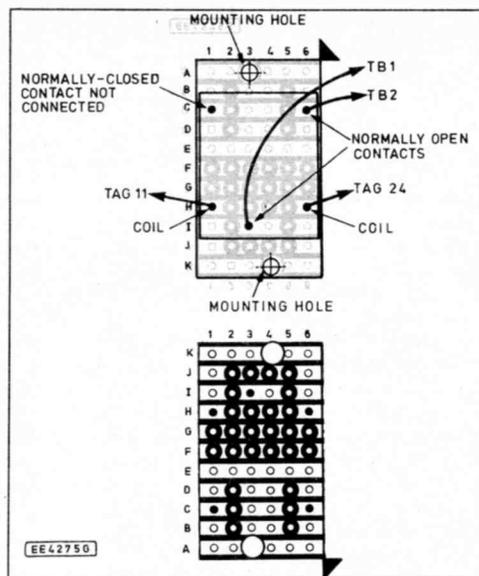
Using a piece of stripboard to mount the relay. The breaks in the copper must be made as shown.
